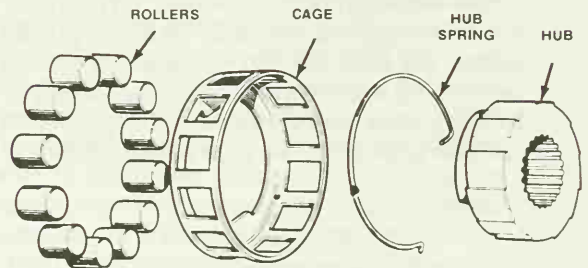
Overrunning clutch parts. (American Motors Corporation)
